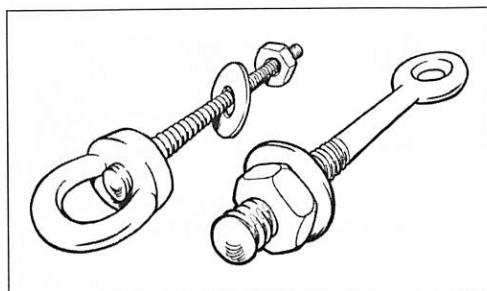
Threaded rod with amon-eye nut (left); eye bolt (right)
